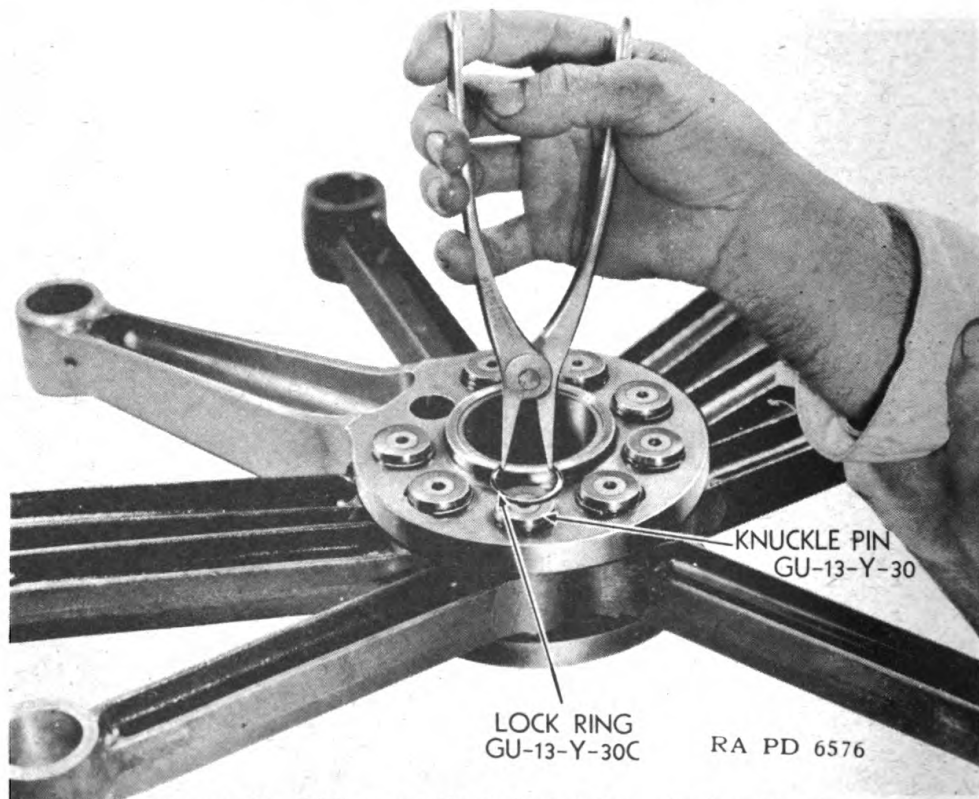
Lifting out the lock ring from the knuckle pin.
